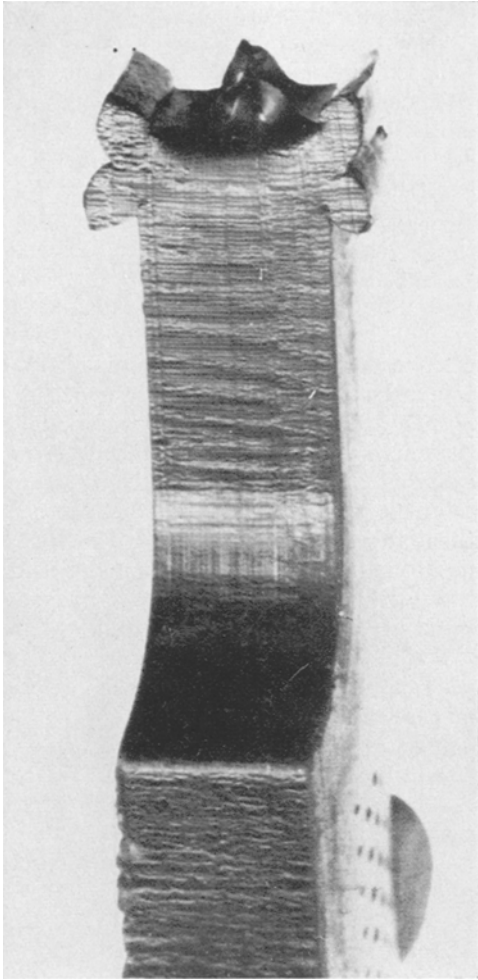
Fracture of a Plastronga PE weld caused by a tensile stress. Failure has been initiated by the notch between the welding bead and the gauge length.
